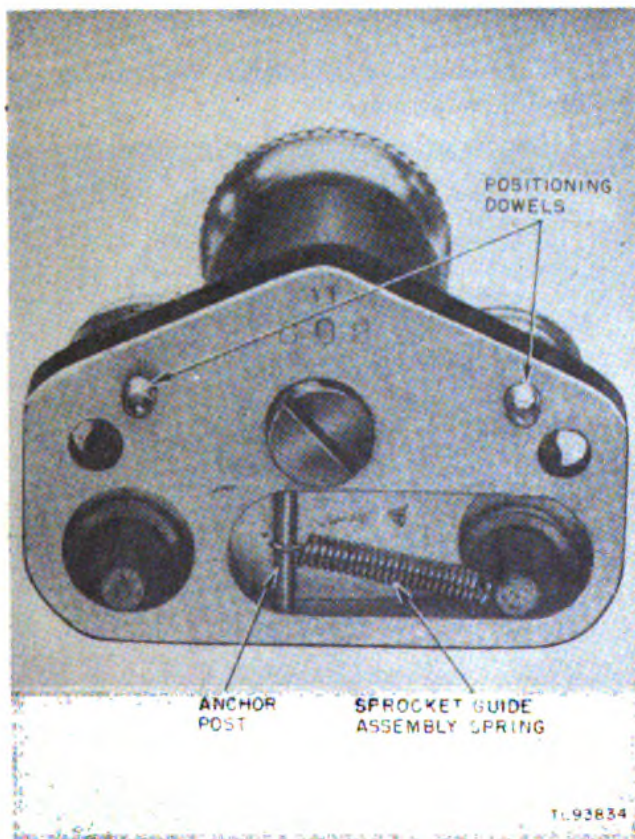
Rear view of sprocket film guide assembly, showing spring.
